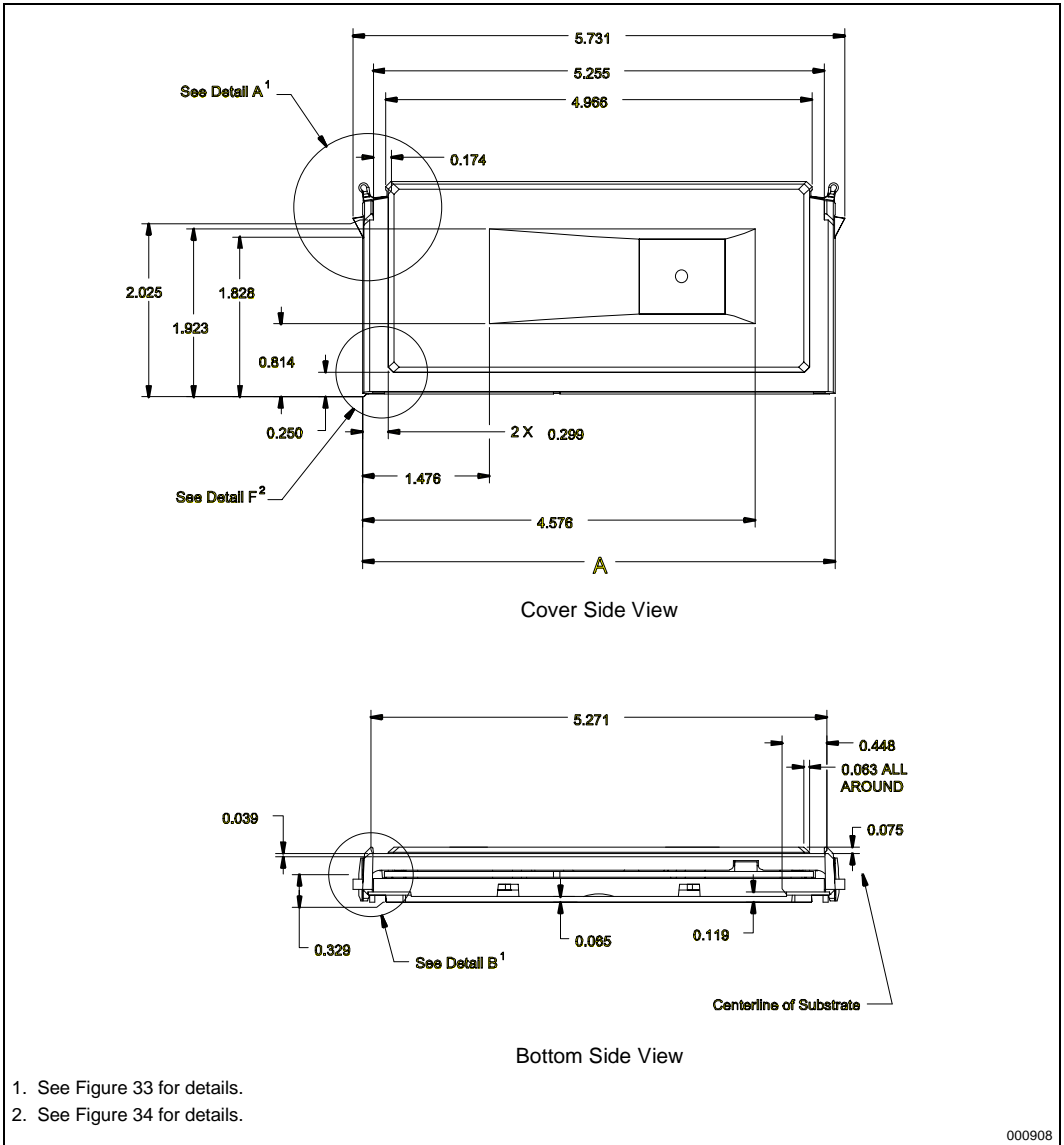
S.E.C. Cartridge Cover and Bottom Side View Dimensions
